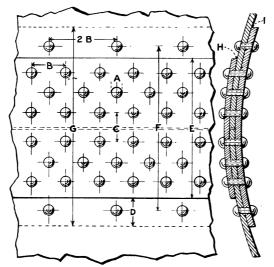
Longitudinal Seams, Quadruple Riveted Butt Joint.
